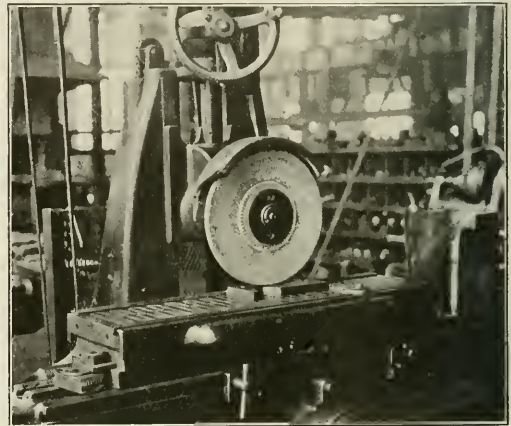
Small Surface Grinder Equipped with Magnetic Chuck
